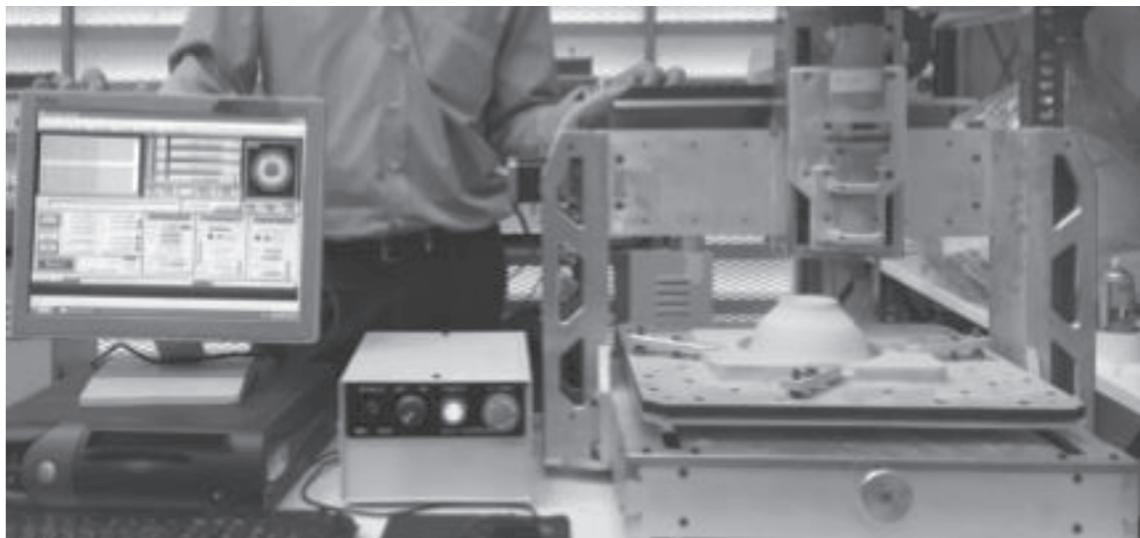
Example of a 3-axis CNC machine for molding ceramic cups/ bowls
